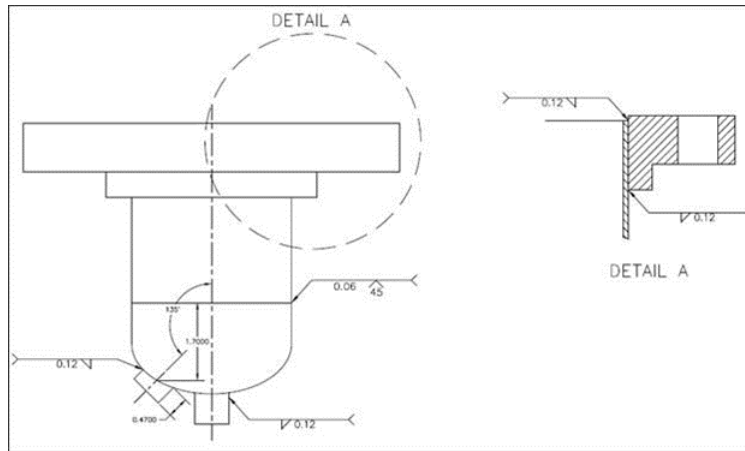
Weld designations to assemble the compression chamber for the first prototype.
